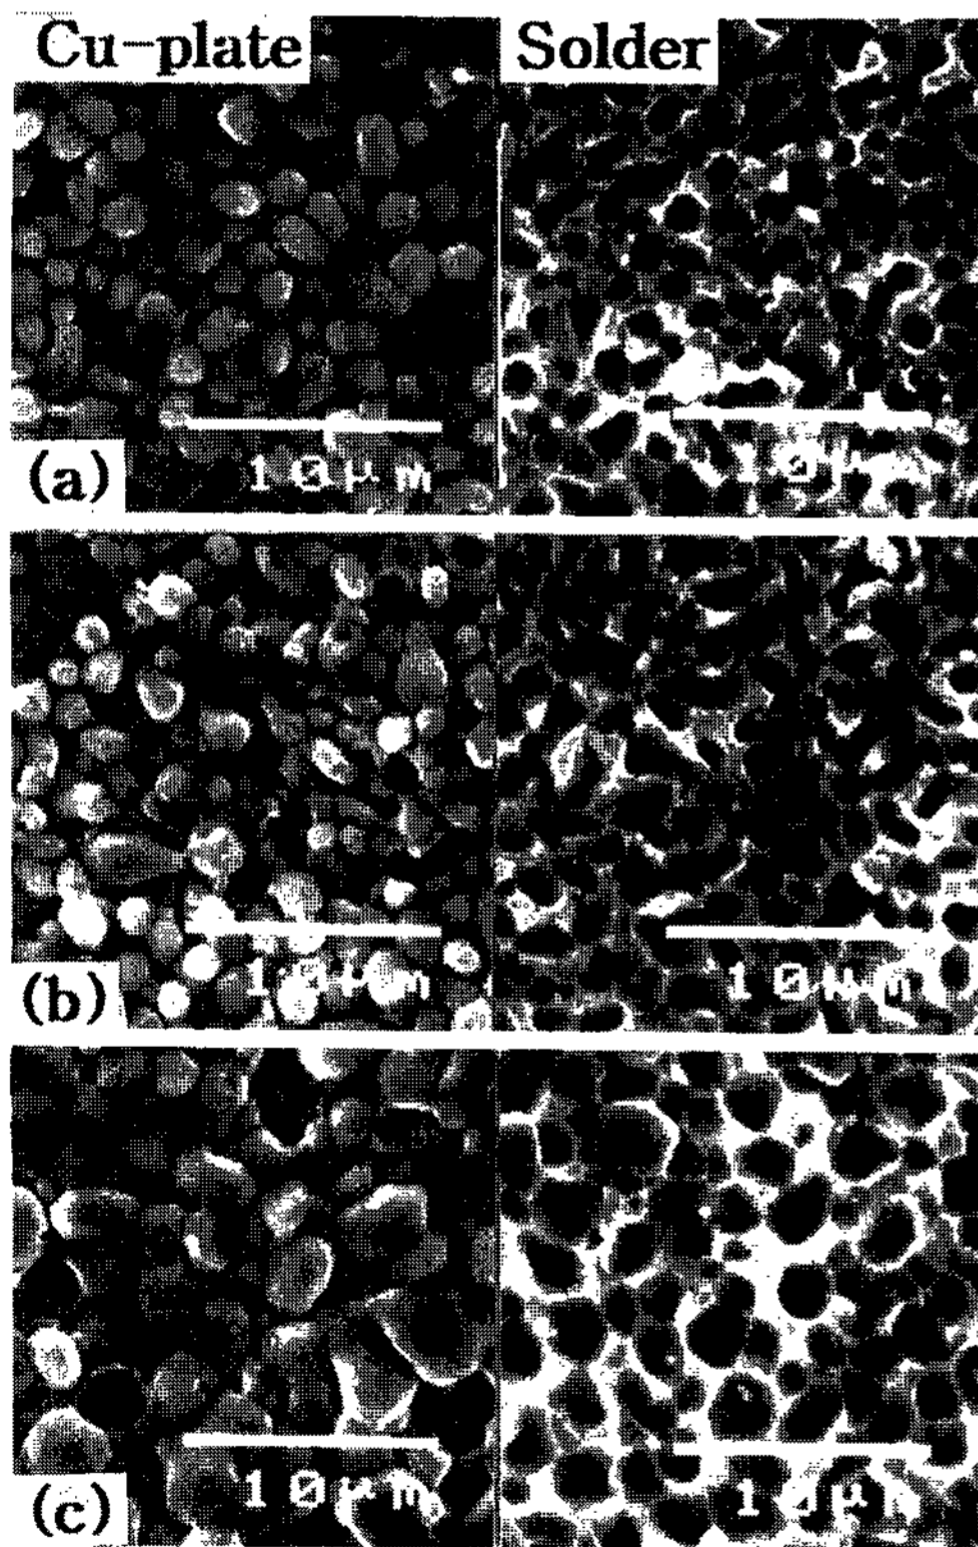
Fracture surfaces of Cu/90Sn-6.9Bi-3.1Ag solder joints. All specimens were heat treated at 100°C for 0day(a), 3days(b) and 30days(c).
